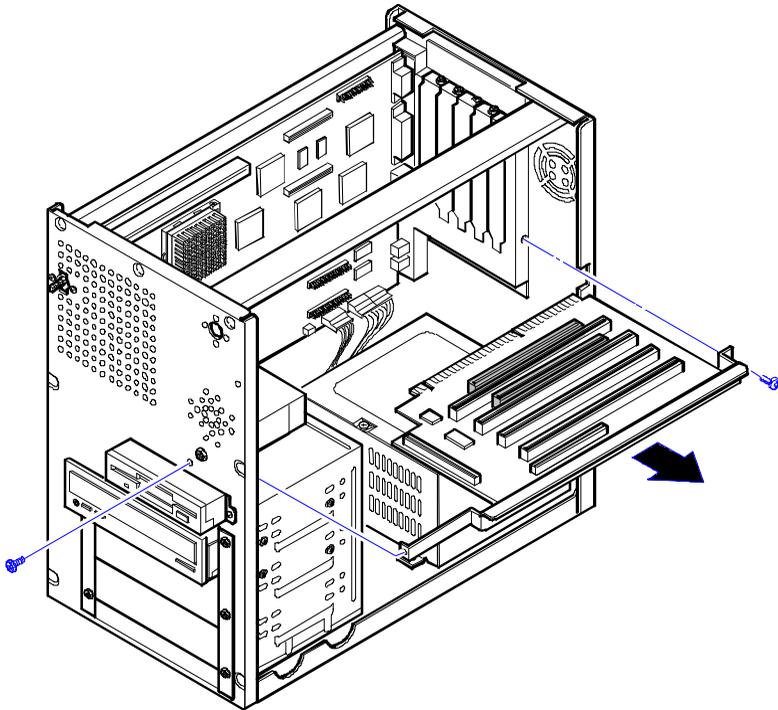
29 Removing the the CELEBRIS GL<sup>ST</sup> Riser Card & Bracket
